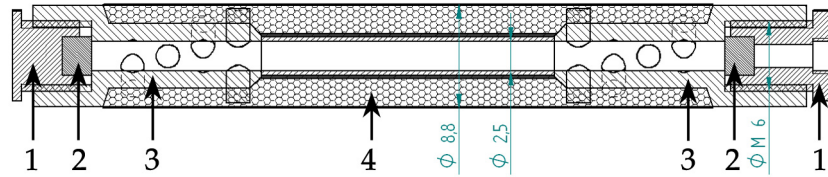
CAD drawing of the FC-PCC: (1) locking screws; (2) 3.3 mm diameter zirconia piston backup; (3) metallic end-part; (4) Zylon fibre and epoxy resin cylinder. The 2.5 mm diameter zirconia piston and the PTFE capsule are not shown for clarity.
